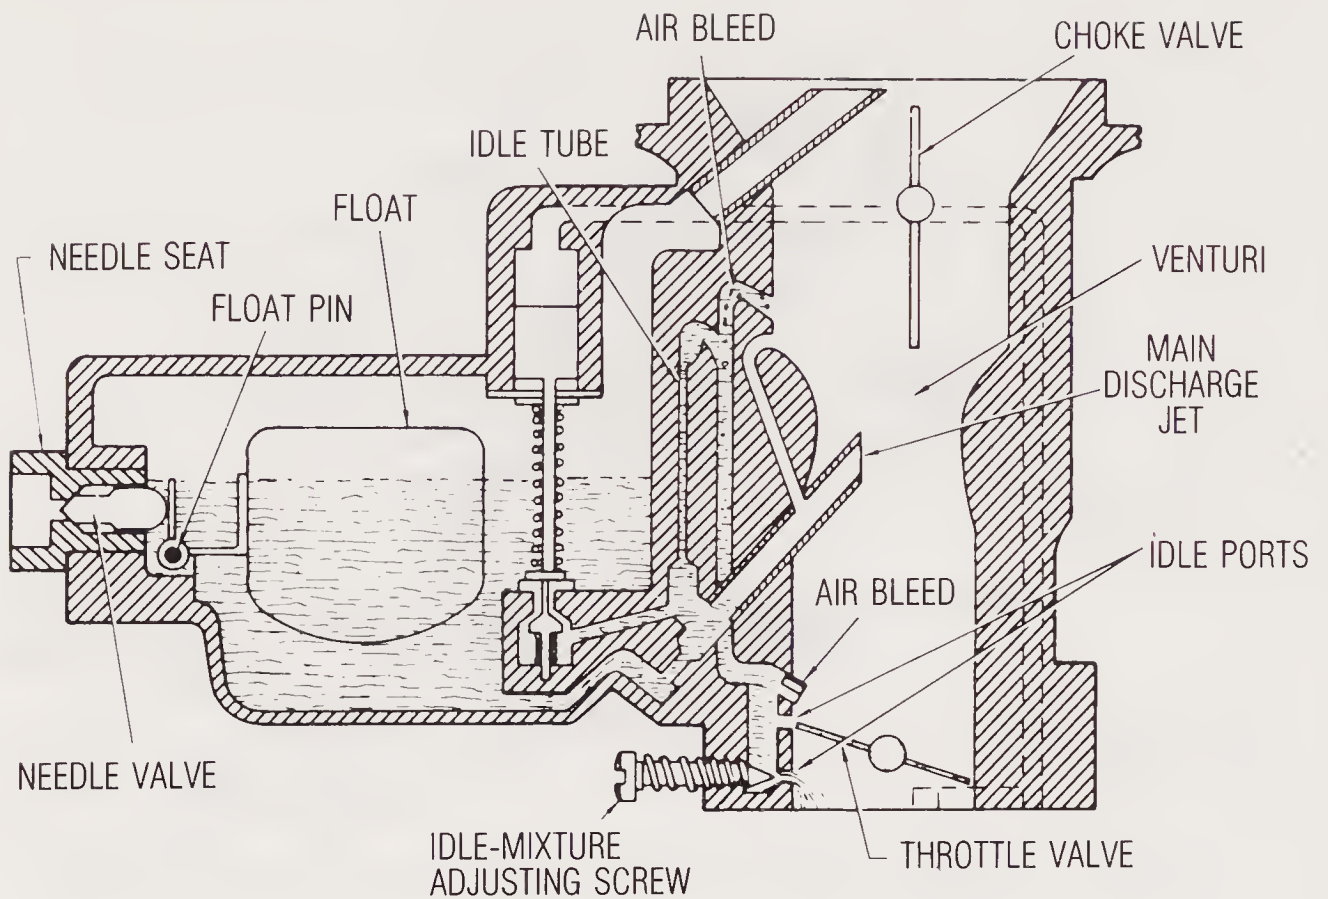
Typical carburetor illustrating the air-bleed principle.
